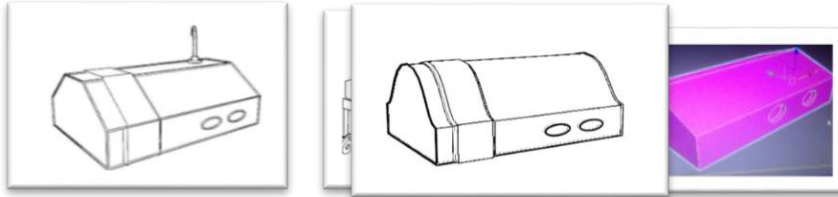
DESIGN GEOMETRY FIGURE 178 DESIGN GEOMETRY FIGURE18 DESIGN GEOMETRY
